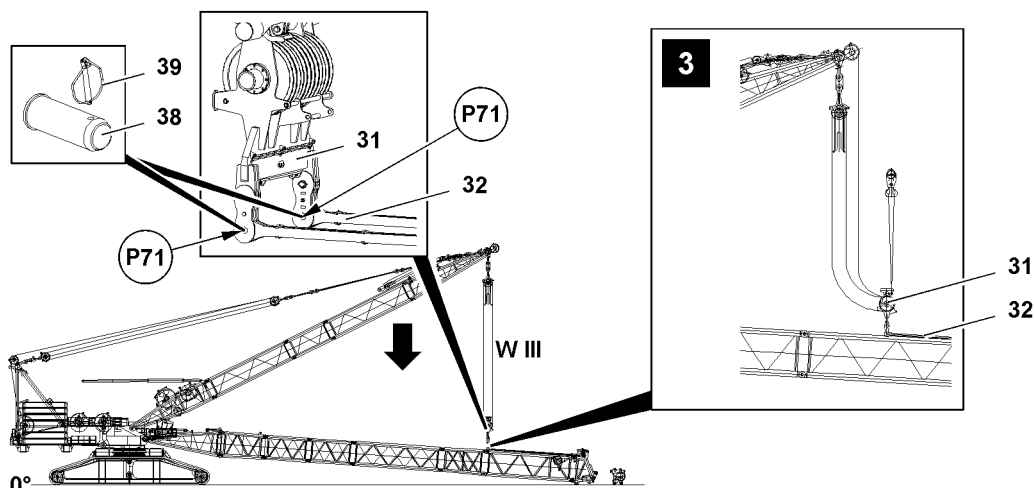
Disassembling the guy rods - Unpinning the upper pulley block
